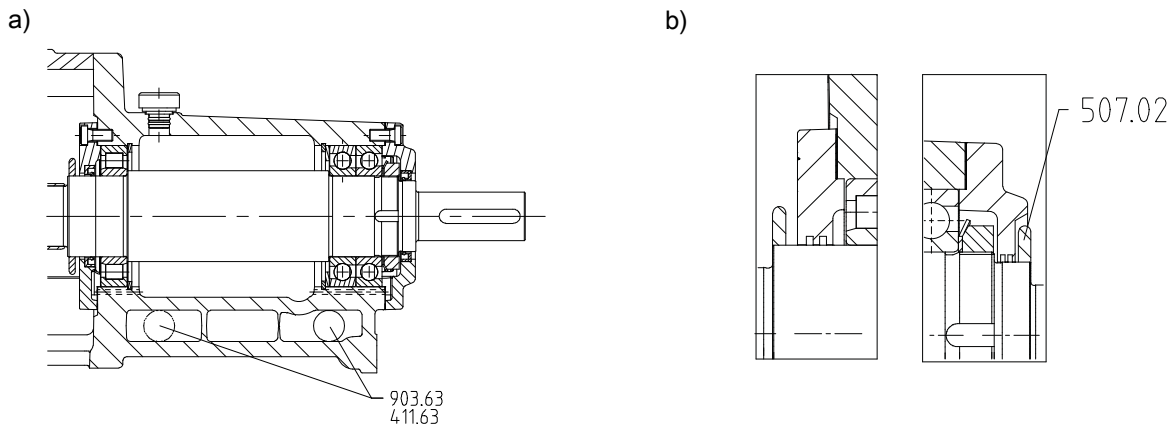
a) Version with coolable bearing bracket, b) Version with labyrinth seal
